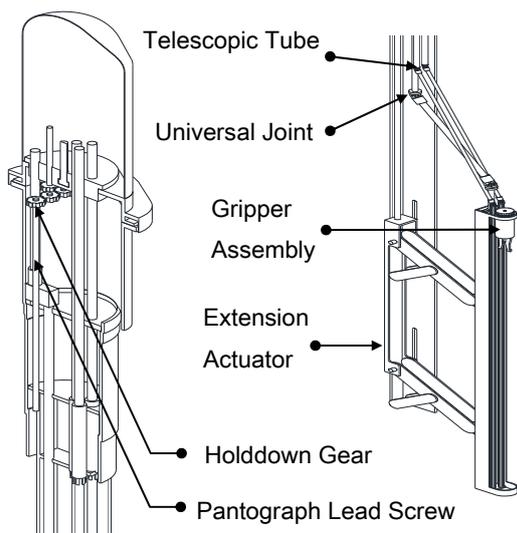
Pantograph mechanism and gripper assembly in PGSFR
